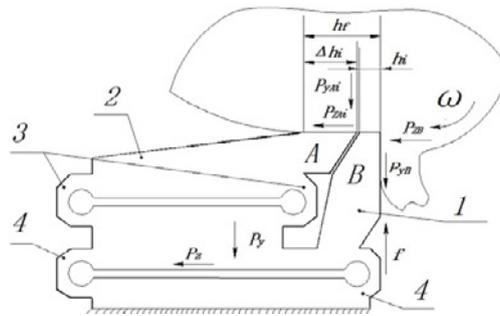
The research scheme of contact loads distribution over the flank-land of the cutting tool by the method of the "split cutter" on a horizontal-milling machine with vertical feed rate f of a table
